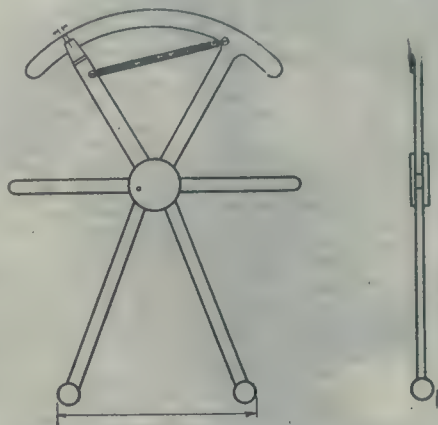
GAUGING APPARATUS EMPLOYED IN THE MACHINING PROCESSES.
